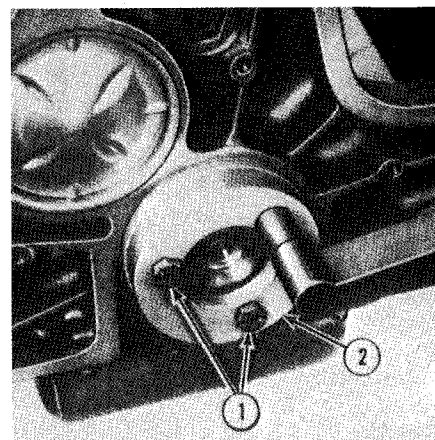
Using special tool No. 1301 (2) to install crankshaft rear oil seal. Tighten cap screws (1) to 25 ft.-lbs. If special tool is not used, seal rear face must be checked for runout with dial indicator mounted on rear end of crankshaft; maximum allowable runout is 0.015 inch.
